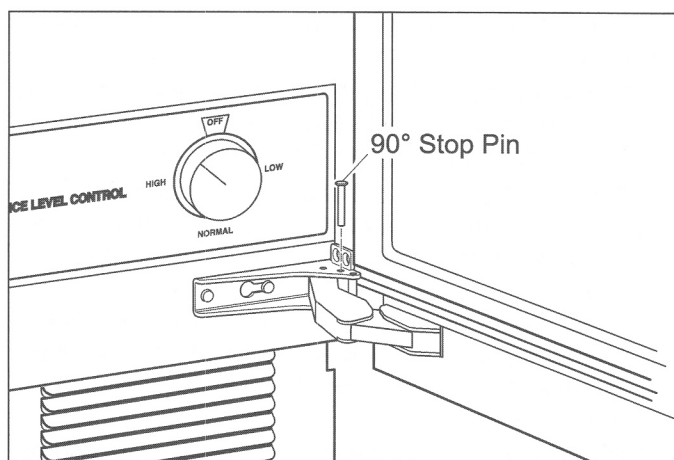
90° Door Stop Pin at Bottom Hinge
